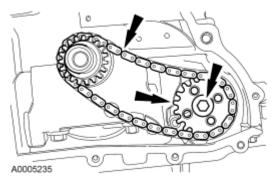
Locating Oil Pump Chain, Sprocket & Bolt Courtesy of FORD MOTOR CO.
